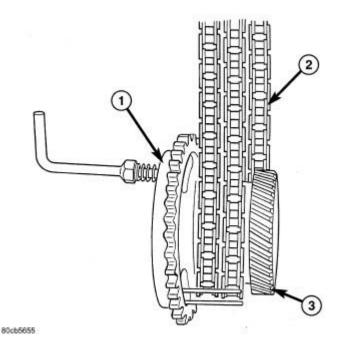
Using Special Tool 8429 Courtesy of CHRYSLER LLC
